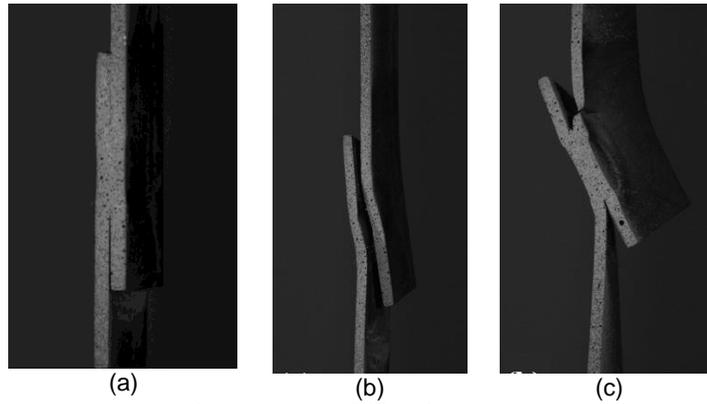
(a) speckle patten produced on 1 mm thick HX340LAD samples to determine the failure mode on the spot welds due to uniaxial tensile loading, showing examples of (b) an interfacial failure for small weld size and (c) a pull-out failure for a large weld size.
